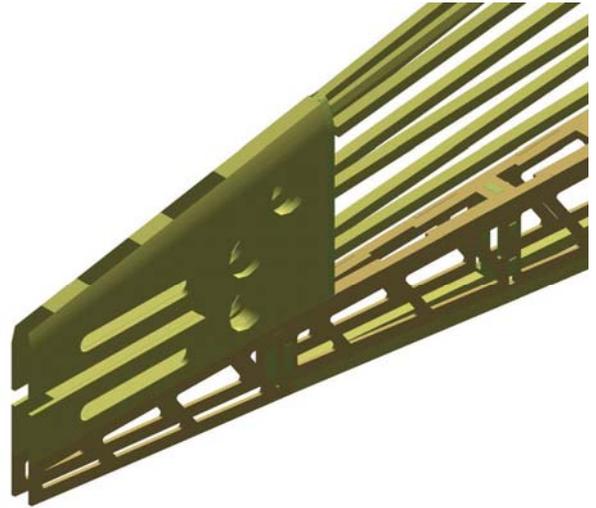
Block sand tail mount so that it blends with the fuselage. Keep a piece of scrap 1/8" balsa in the trailing slot. Do not oversand the trailing edge of fuselage. Avoid sanding top surface of tail mount so vertical stab position is not modified. Sand smooth the entire fuselage.
